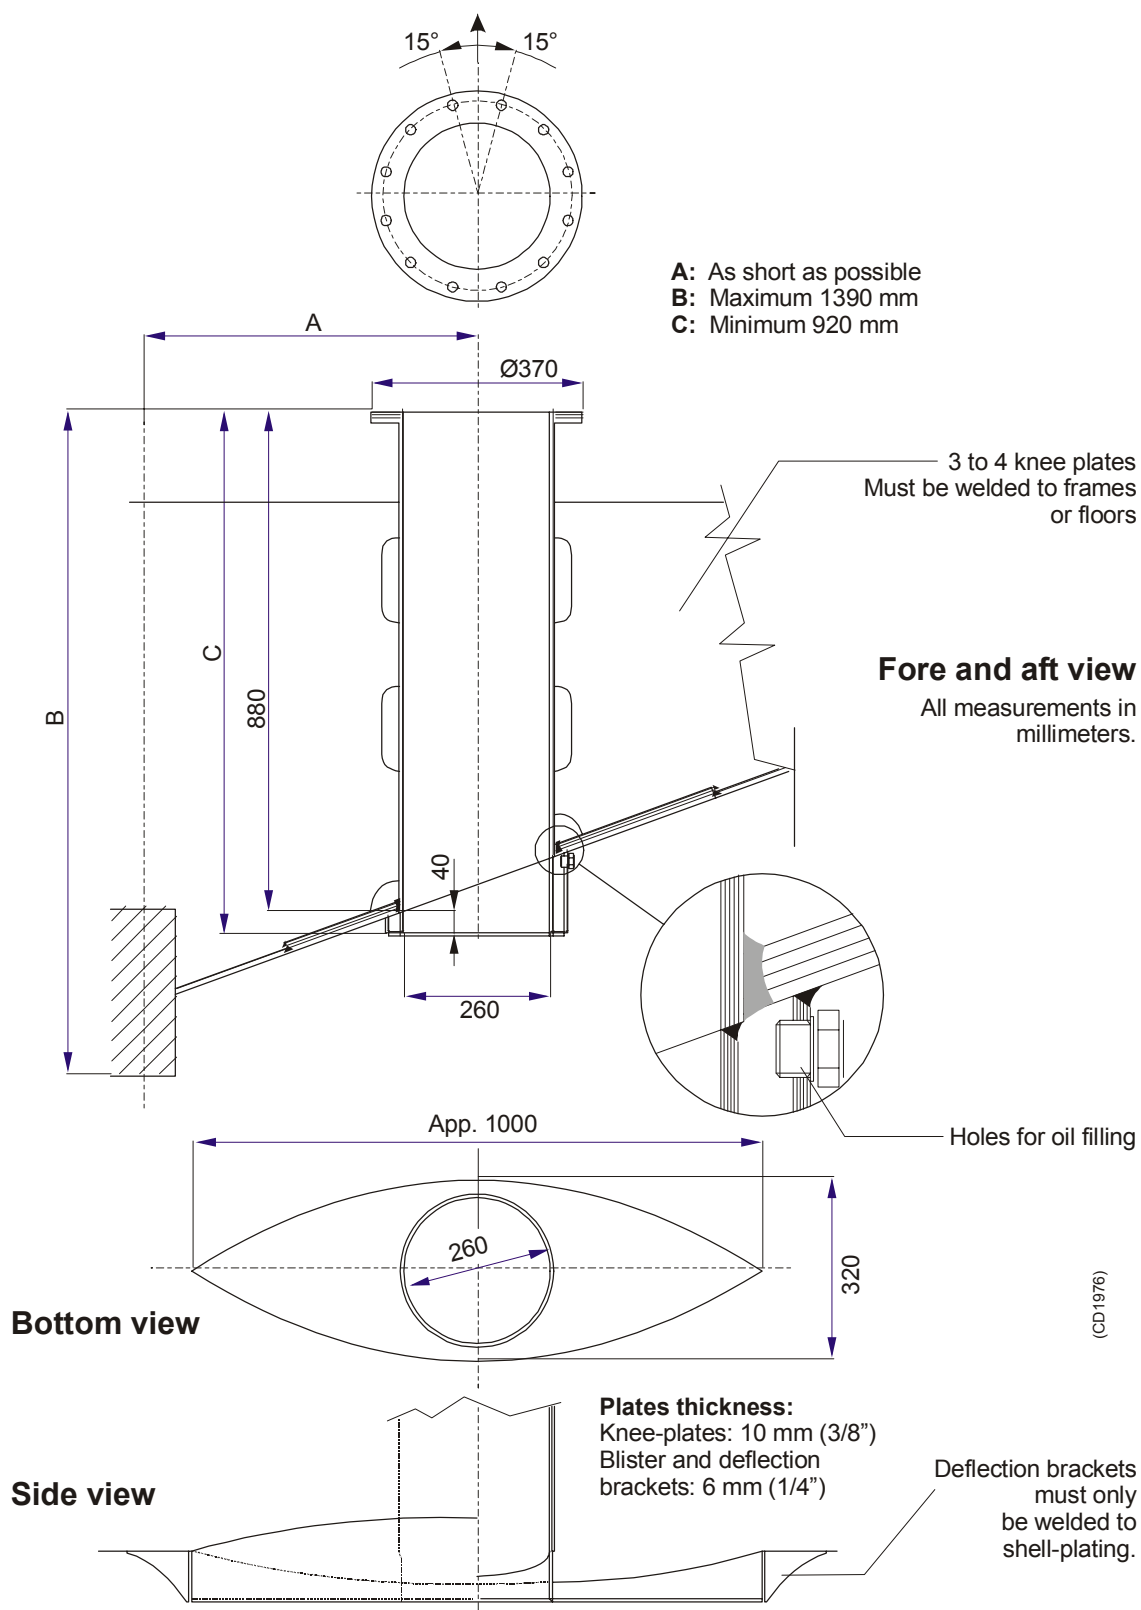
SH80 Trunk installation with extension and oil-filled blister.
